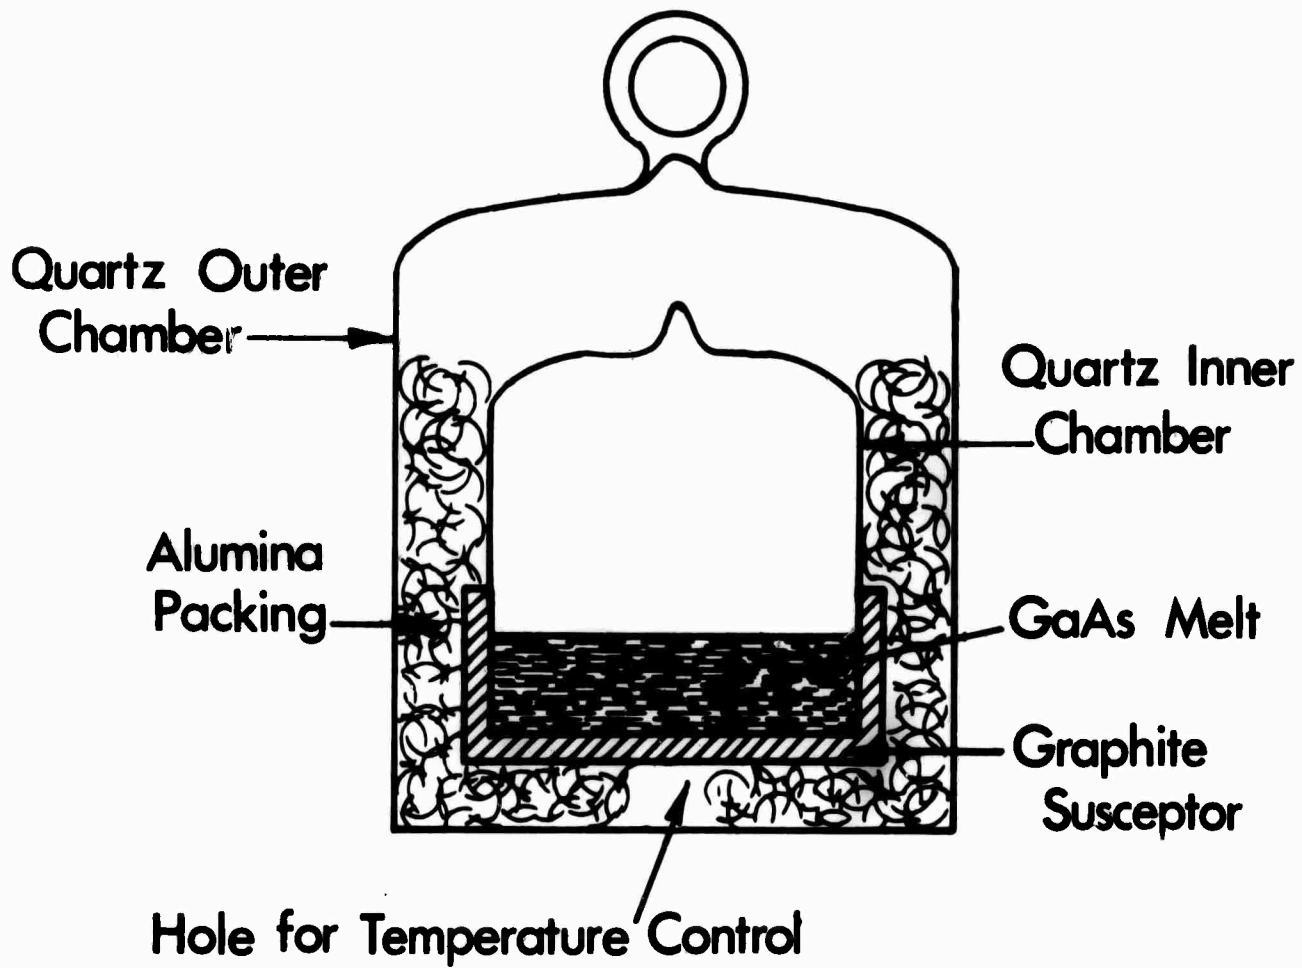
Method Used for Casting Large-Diameter Window Blanks
